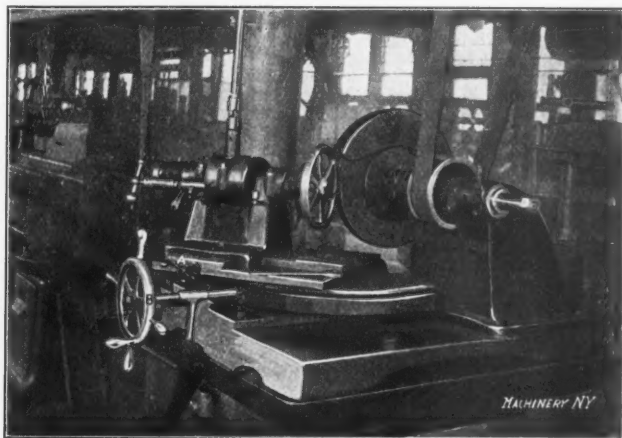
Special Machine for Grinding Rims of Hand-wheels
